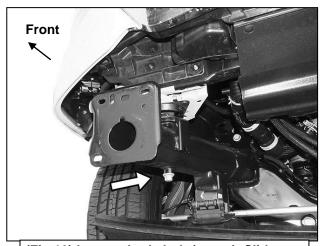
Attach passenger/right Support Bracket to bottom of frame and back of Frame Bracket. Models with tow hooks, reuse factory hex bolt to attach Bracket to bottom of frame
